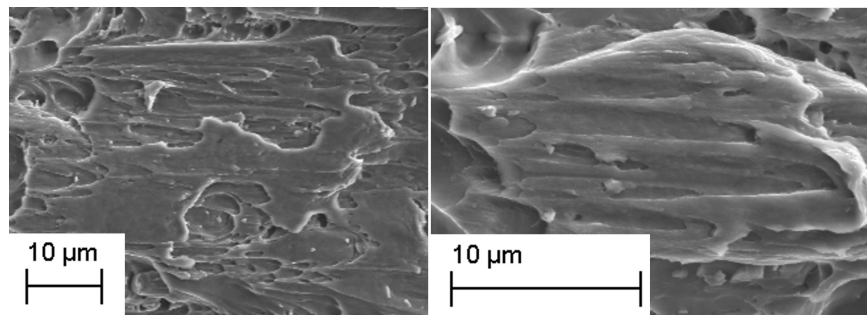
Flatter regions seen on the edge specimen fracture surface with irregularities in the surface.
